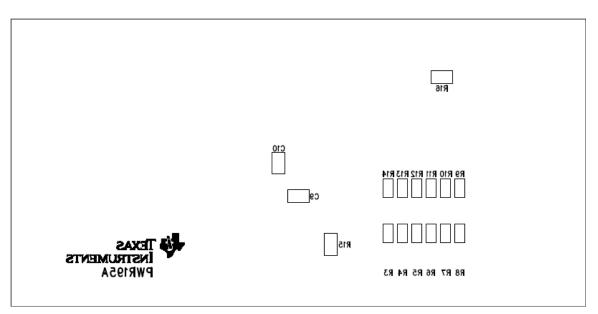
LMZ317xxEVM Bottom-Side Component Layout
